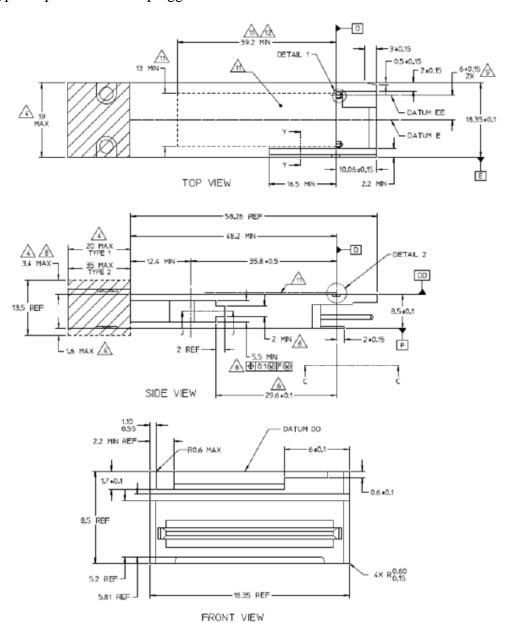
FTCD8613E1PCM Mechanical Dimensions.
